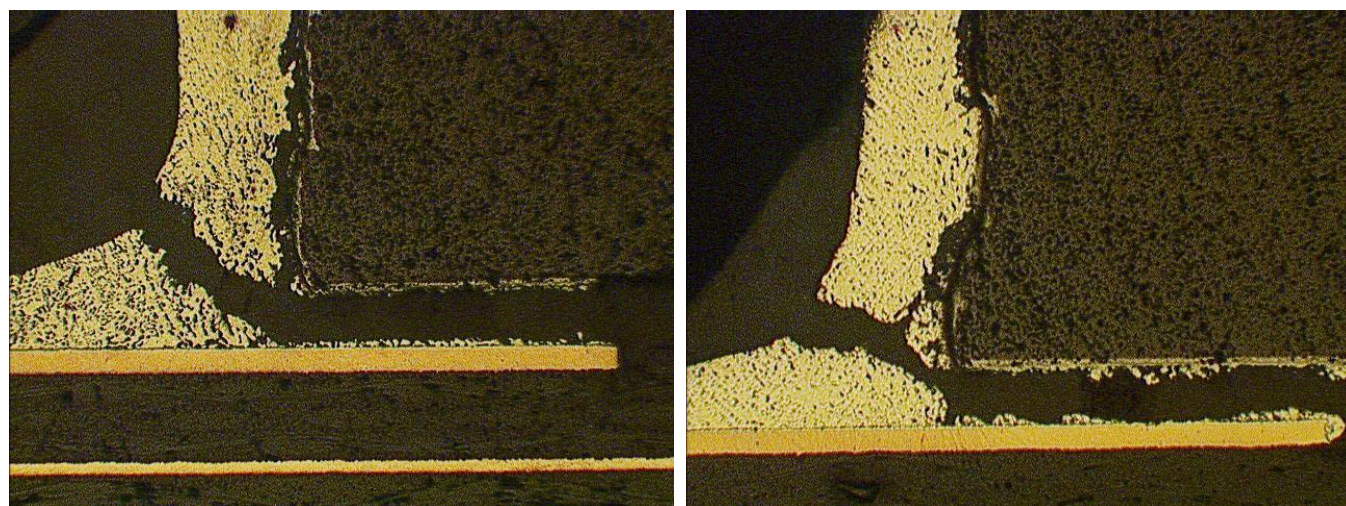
CLCC-20 Solder Joints, Left- Board 164, Component U14, SAC305/SnPb, Failed @ 1248 Cycles, Right - Board 126, Component U14, SnPb/SAC305, Failed @ 2064 Cycles
